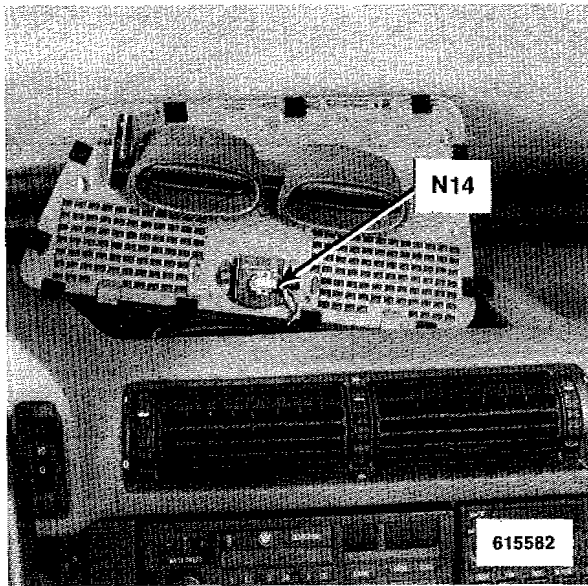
Top Center Of Dash (IHKA Outlet Grille Removed)
